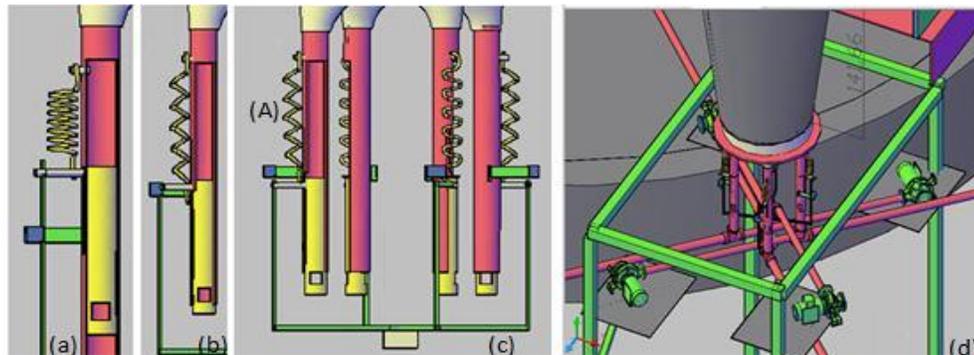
Weighting mechanism show a) initial position, b) after one hundred grams, c) electromagnetic coil firing and d) fan configuration.
